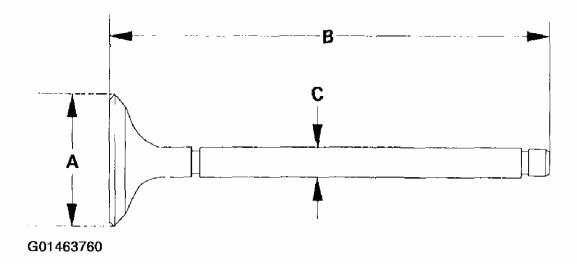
Measuring The Valve Courtesy of AMERICAN HONDA MOTOR CO., INC.
